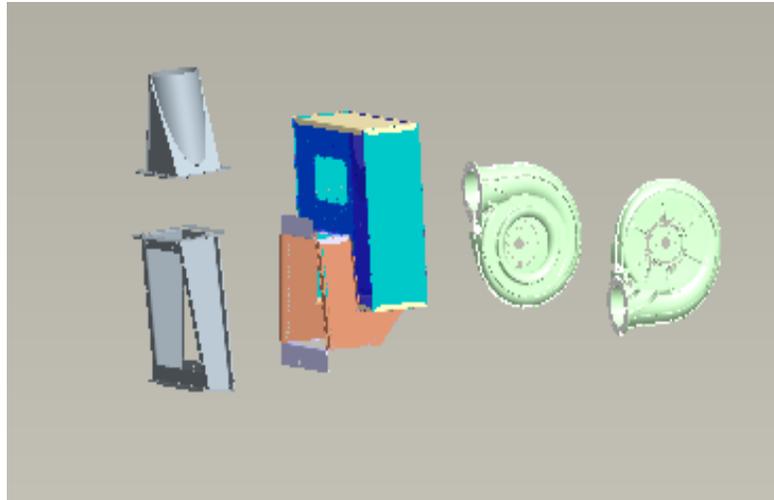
An exploded view of the cob separation system shows the two piece blower/spout chute, air plenum, and
